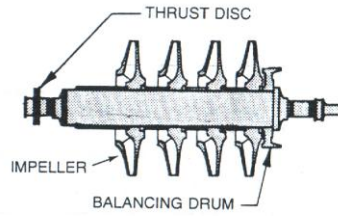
Components of the centrifugal compressor rotor assembly.
